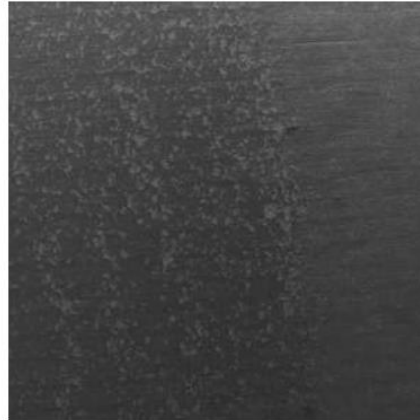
Image performed in the SEM of the coating machined by Ball Nose in the zig zag direction in the transition region between the machined coating and the machined substrate caused due to the angulation in the machining.
